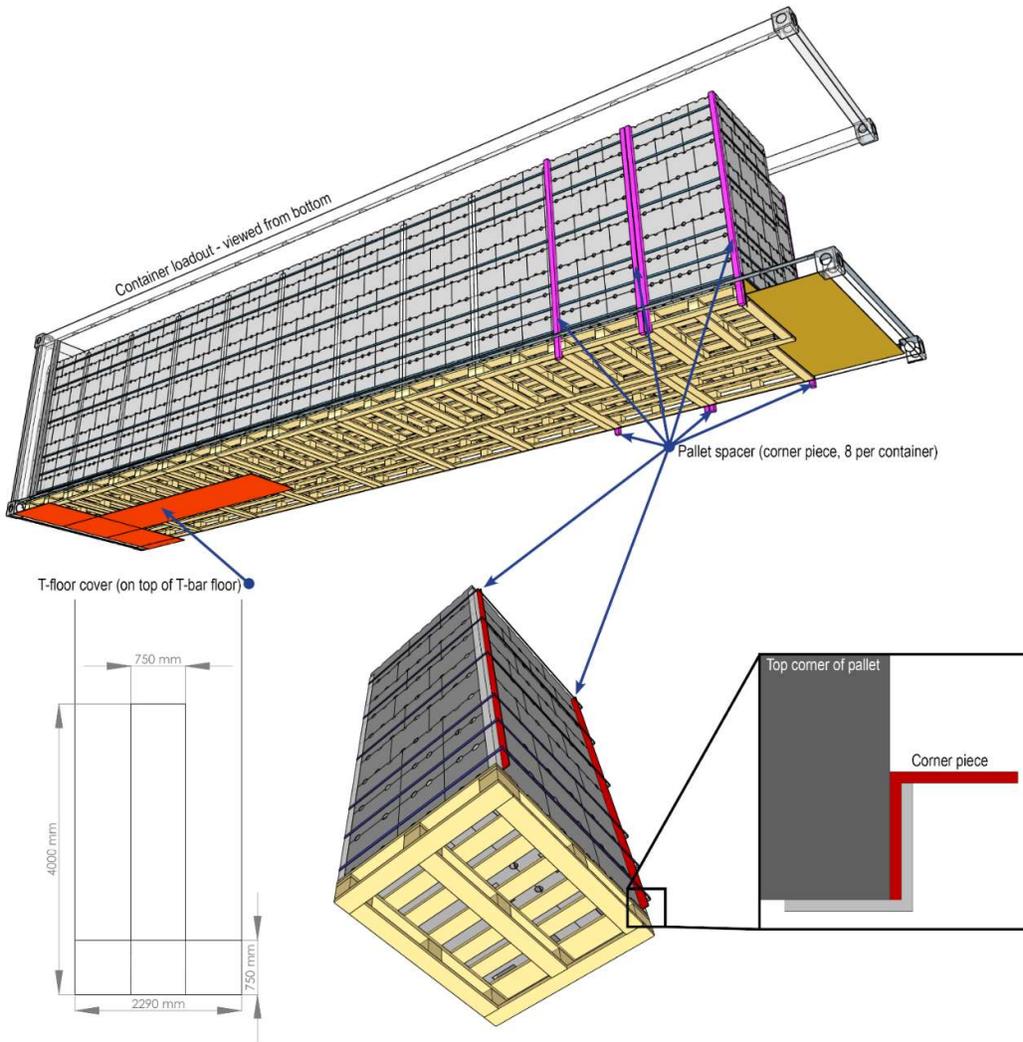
Illustrations of the T-floor cover and pallet spacers.
